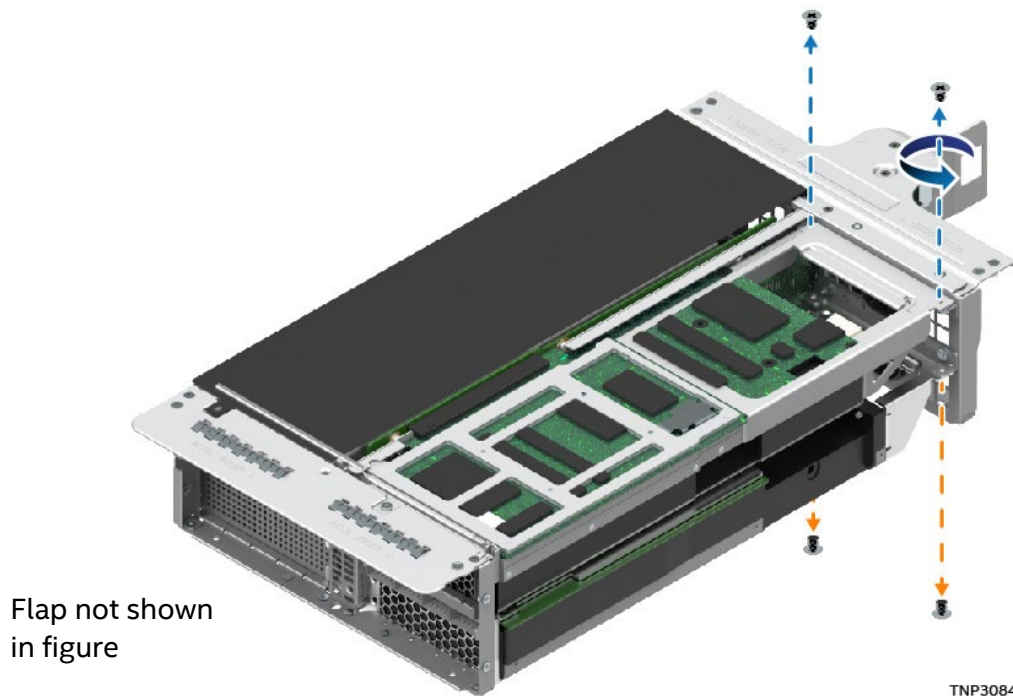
Detaching Accelerator Add-In Card from Riser Assembly
